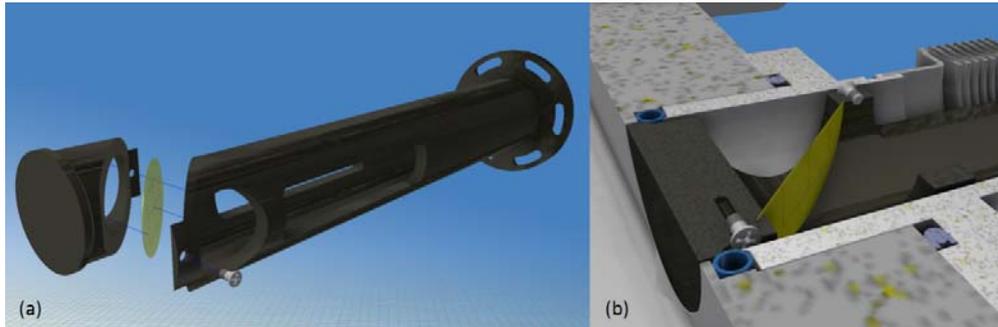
(a) Screen carrier assembly. (b) Carrier in parked position shorted against RF spring seal.
